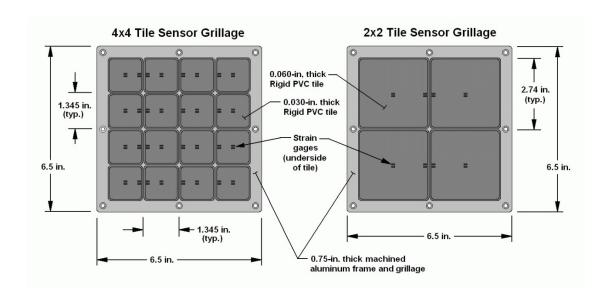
Deckhouse and Slam Grillage Details for JHSS Segment 1 Insert
